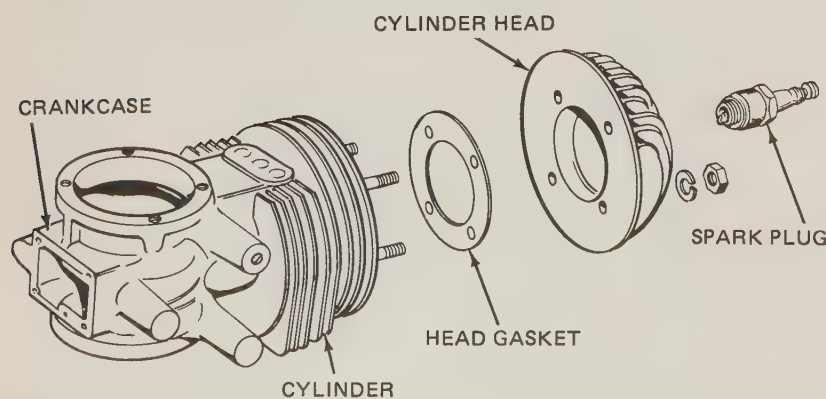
Cylinder head and cylinder of a single-cylinder two-cycle engine, with related parts. (Jacobsen Manufacturing Company)
